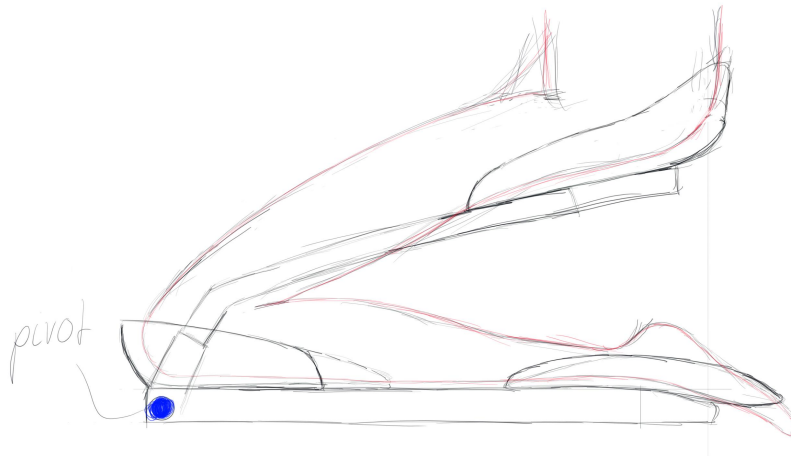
Side view sketch of the chassis with a frontal pivot point.
